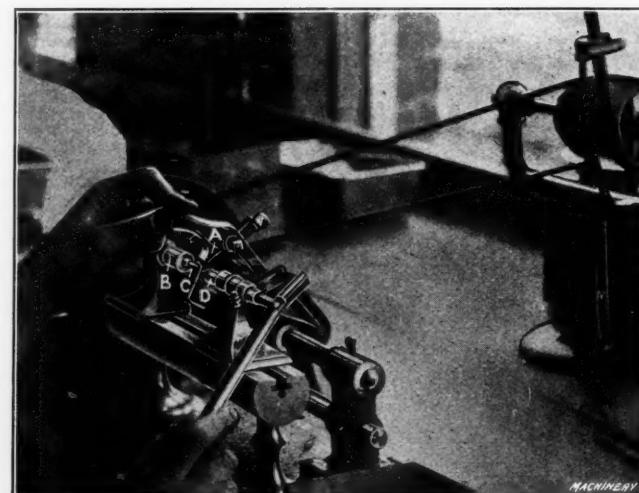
Bench Lathe with Special Chasing Attachment for turning Bushings
